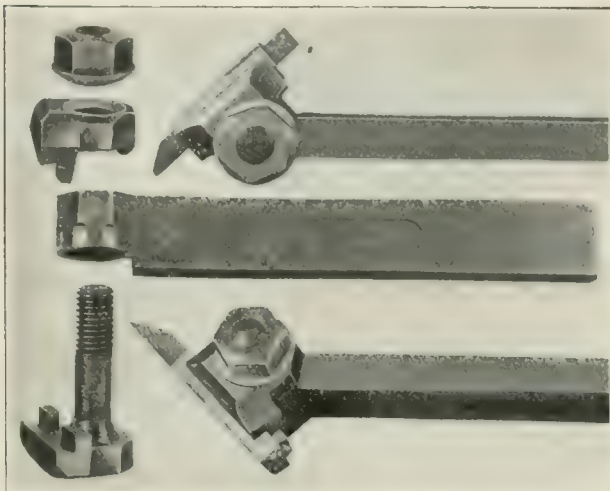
The Tool Holder Made by the T. R. Almond Mfg. Company, Ashburnham, Mass., Showing the Unassembled Parts and the Holder Made Up as a Right-Hand Offset Side Tool and a Left-Hand Offset Turning Tool Using a Bushing.
